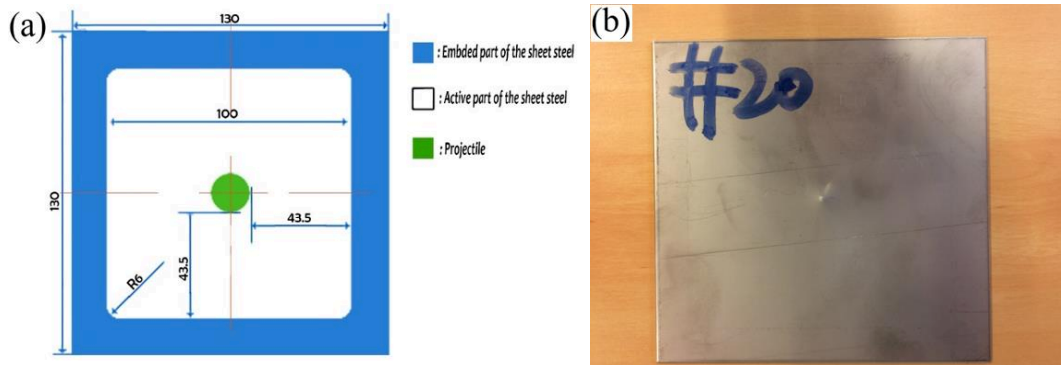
Geometry and dimensions of the 304 ASS plates used in perforation tests: (a) schematic illustration and (b) actual shape.
